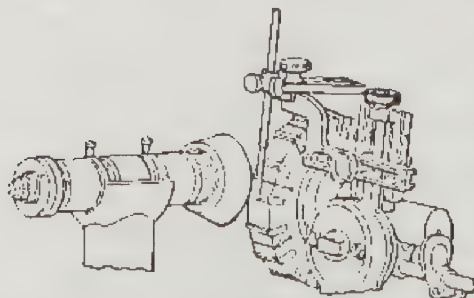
Cup when Used to Grind Inserted with Cutters.
